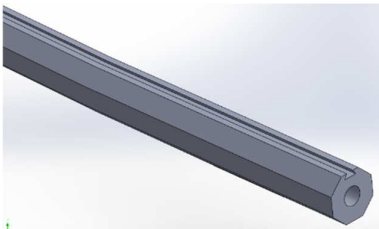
Version 3 hexagonal section with a dovetail groove.
